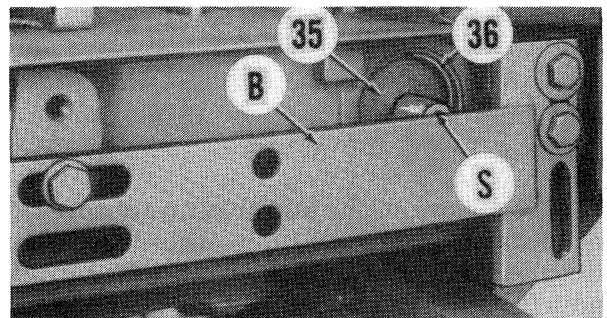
Use a spacer (S) and bar (B) attached to frame mounting holes to push piston plug (35) in so snap ring (36) can be removed or installed.
